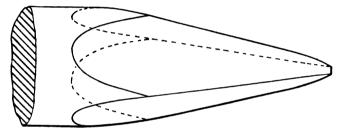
Roughing or chisel tool for punch-cutting machine. 20 times full size.
